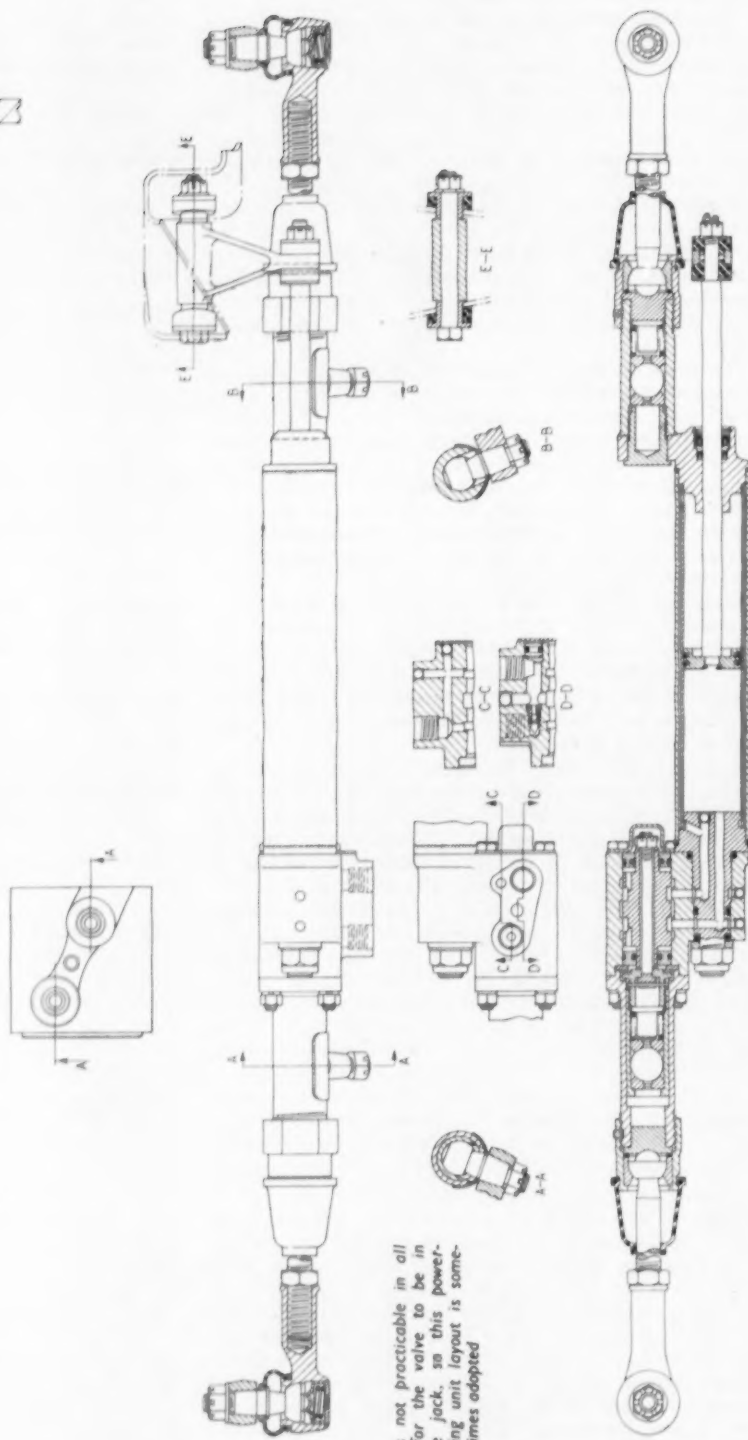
It is not practicable in all installations for the valve to be in line with the jack, so this power-assisted steering unit layout is sometimes adopted
